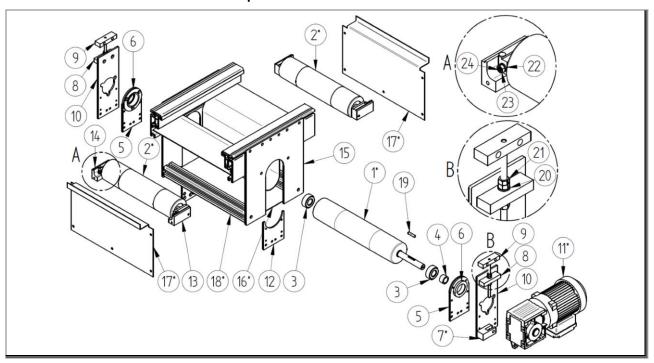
Parts list: central drive unit - position of drive unit 56 - ZZ.902.0000.01 (typical)
